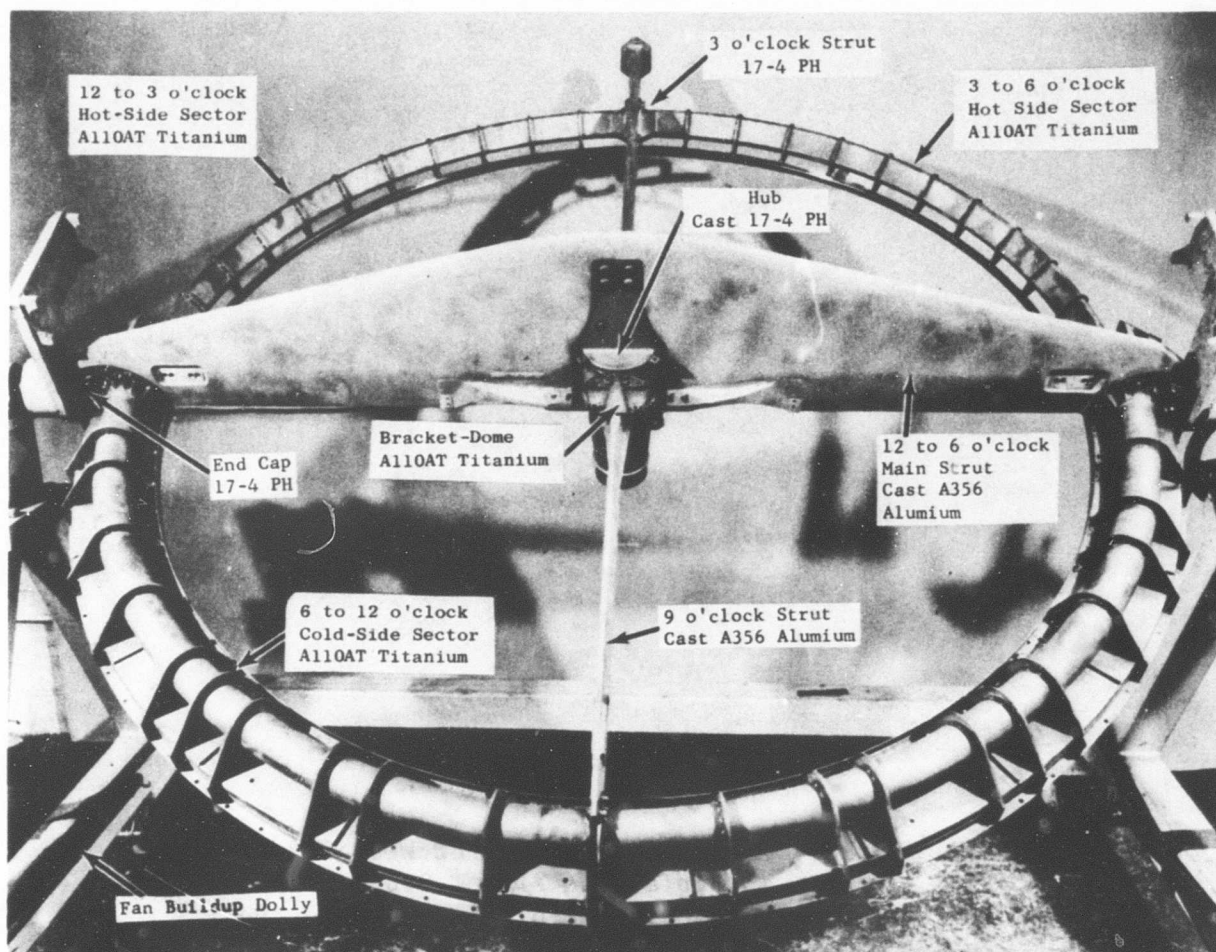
LF-2 75.26-Inch-Diameter Front Frame View Showing Component Subassemblies and Their Materials; the Dome Which is an Epoxy Fiber Glass Lay-up is not Shown.
